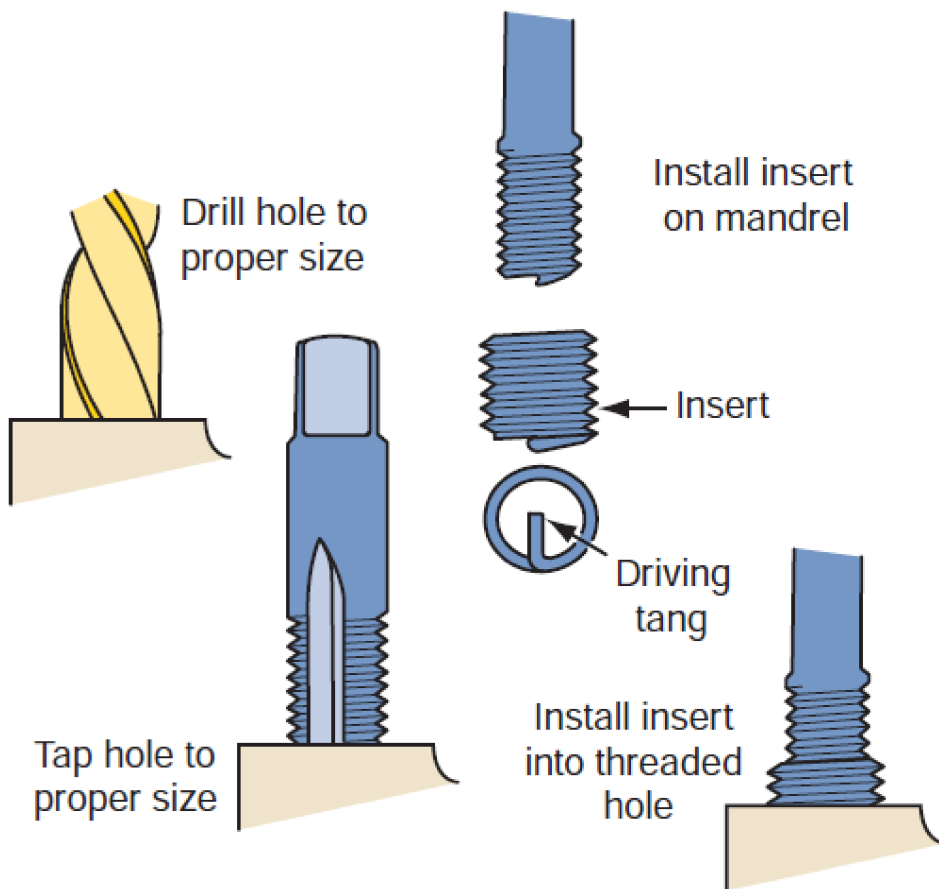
Using a threaded insert to repair damaged threads.
